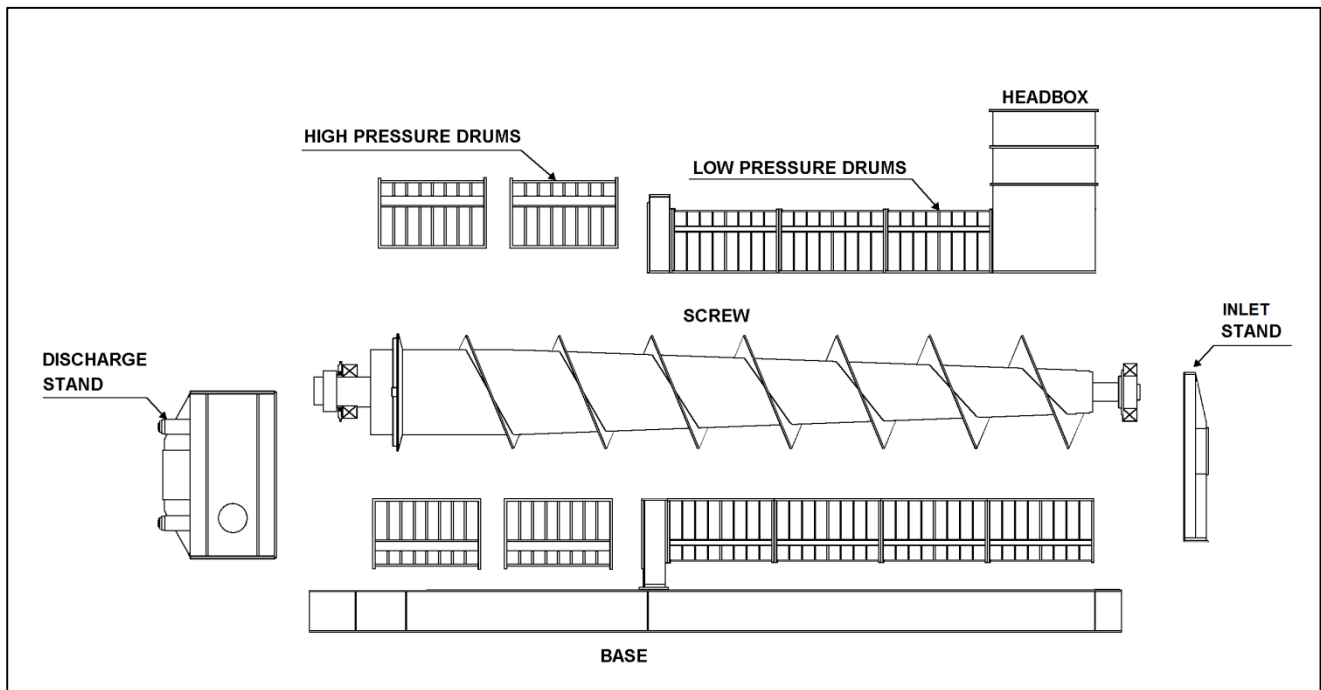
B - SCREW PRESS EXPLODED VIEW
